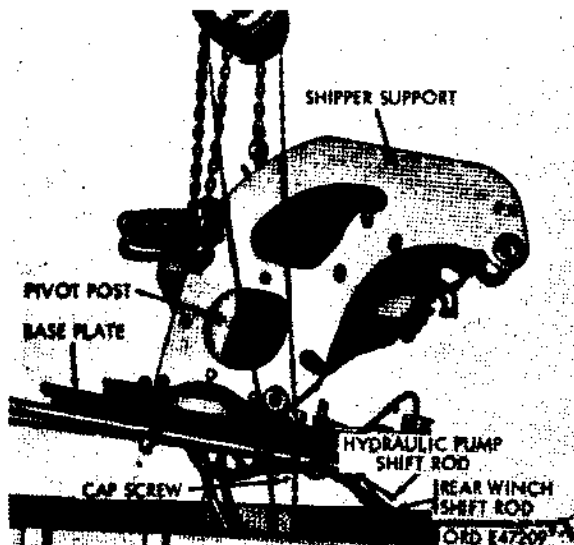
Removing base plate and pivot post assembly from crane body (M62)
